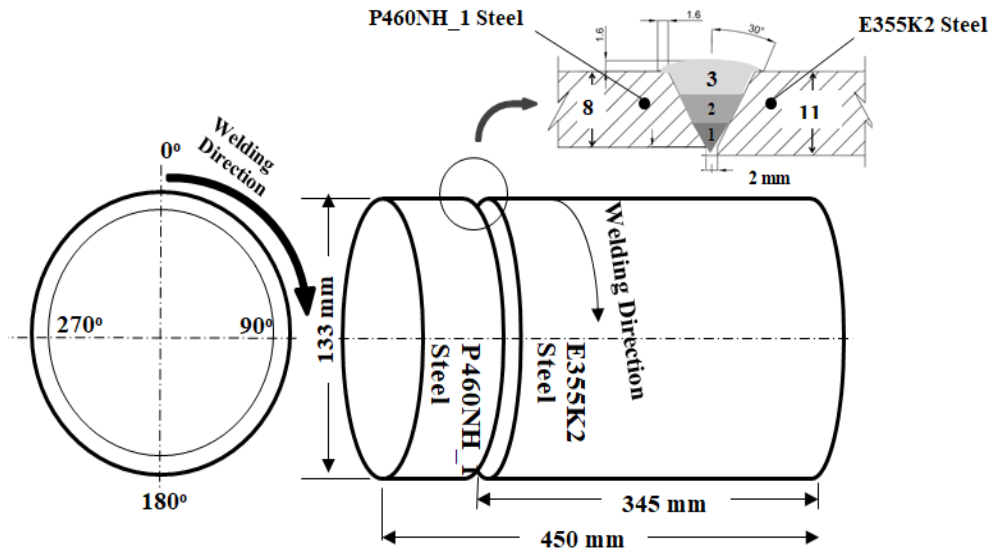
Schematic sketches of the welded pipe with the welding direction for three passes, dimensions in mm
